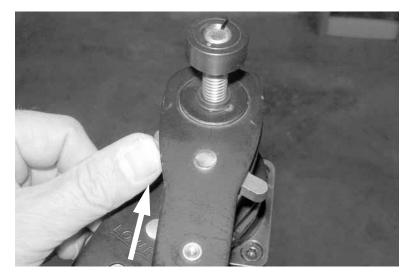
Set the knob on the clamp handle to the clamping direction. The clamp handle will engage clockwise to clamp the legs in the tube.
